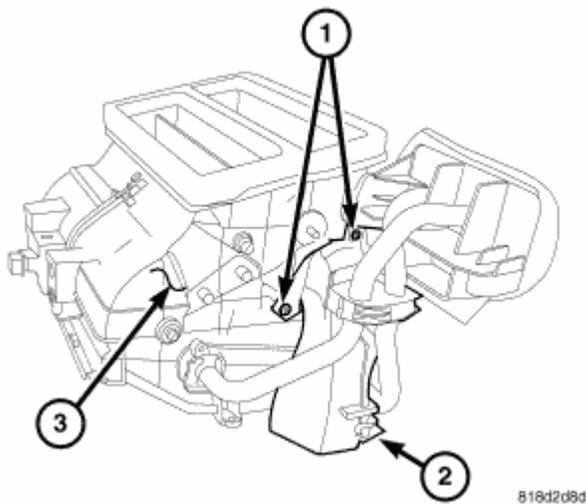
Removing/Installing Two Screws That Secure Upper Front Passenger Side Floor Duct To Passenger Side Of Air Distribution Housing And Upper Duct
